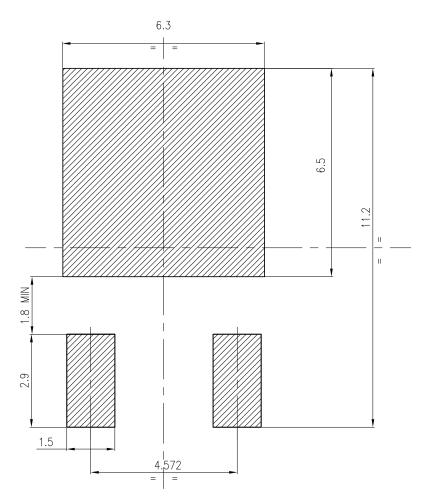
DPAK (TO-252) recommended footprint (dimensions are in mm)
